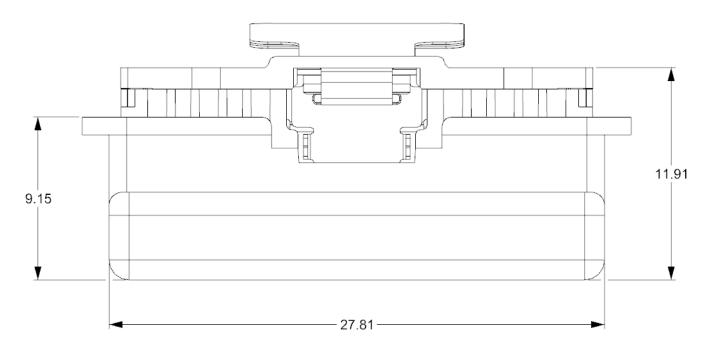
Top View of Free-Side Connector with Dust Cover Attached
